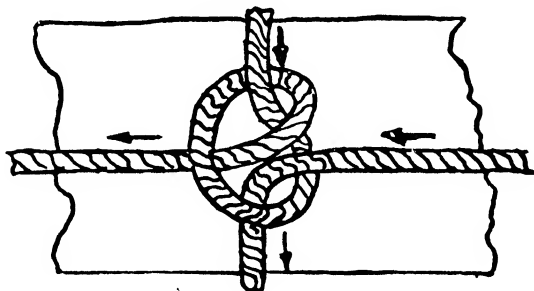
RIB STRINGING, DETAIL OF KNOT
